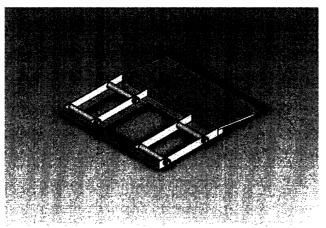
Final modified solid model design using aluminum angle for the frame, aluminum rods for the rollers, flange ball bearings, and plywood ramp.
